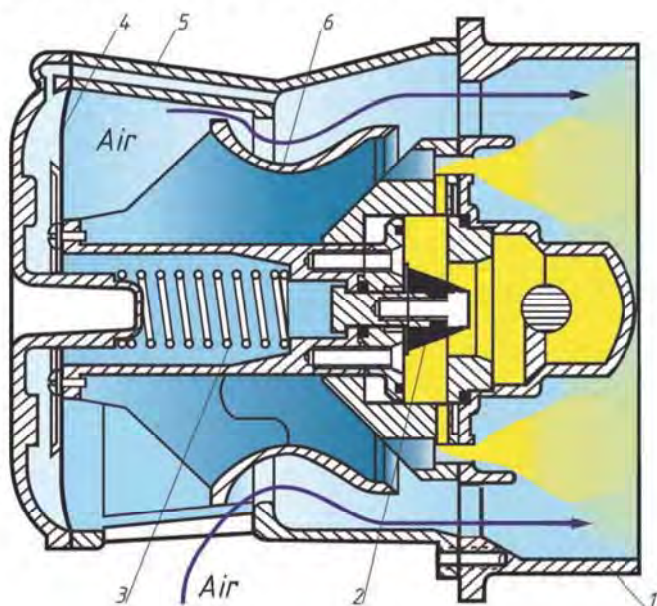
Gas mixer for Caterpillar G 3500 series engines: 1 – mixer housing; 2 – gas valve; 3 – gas valve spring; 4 – gas valve drive diaphragm; 5 – channel for supplying vacuum under the diaphragm of the gas valve drive; 6 – diffuser (adapted from [86])
